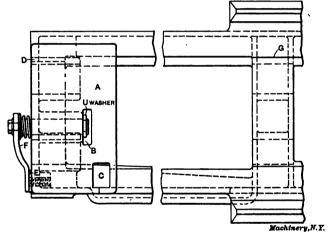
Templet and Gage used when Boring the Bed, shown in Position
